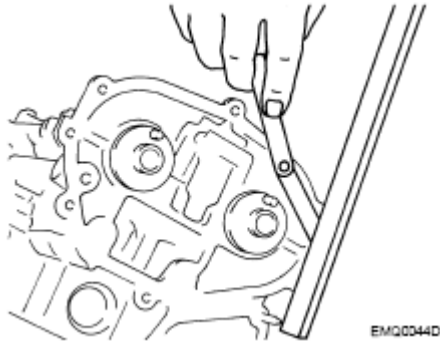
Measuring Between Front End Faces Of No 1 Camshaft Bracket And Cylinder Head
